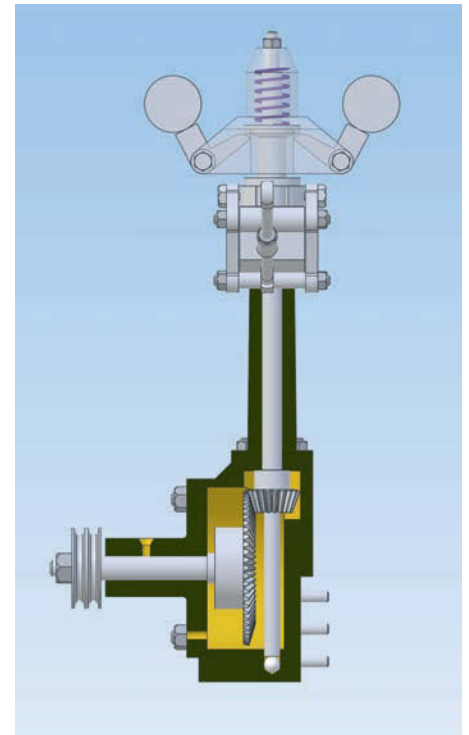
Cross section of the governor using 3:1 commercial bevels and a grooved driving pulley.
